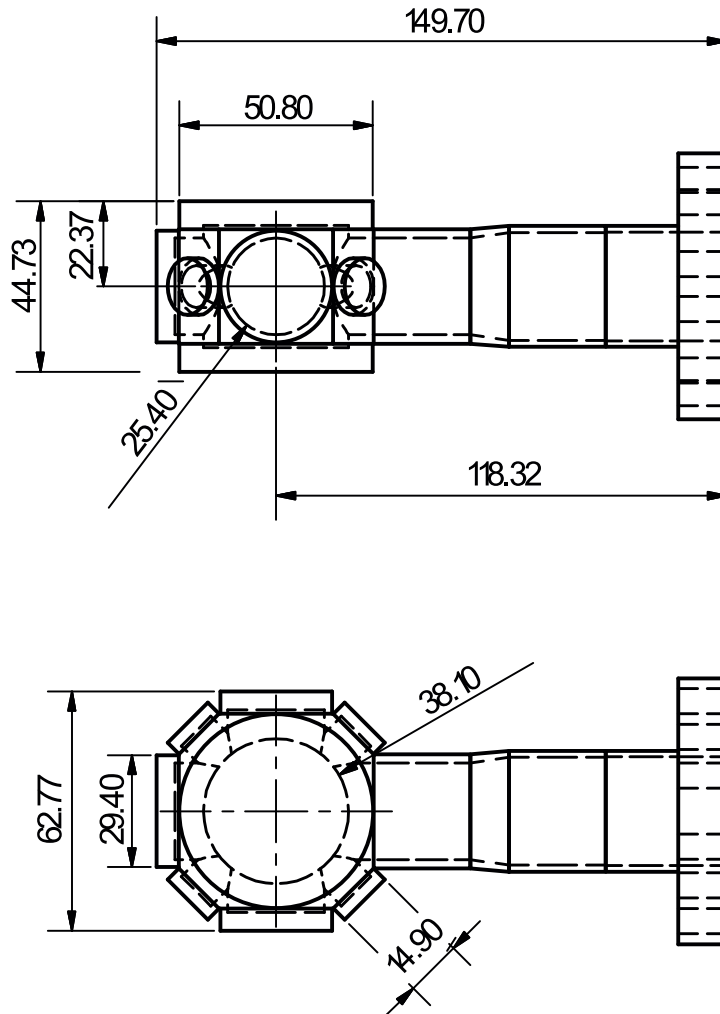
, Octagonal Glass cell: Technical drawing of our glass cell. All dimensions are given in millimeter.
